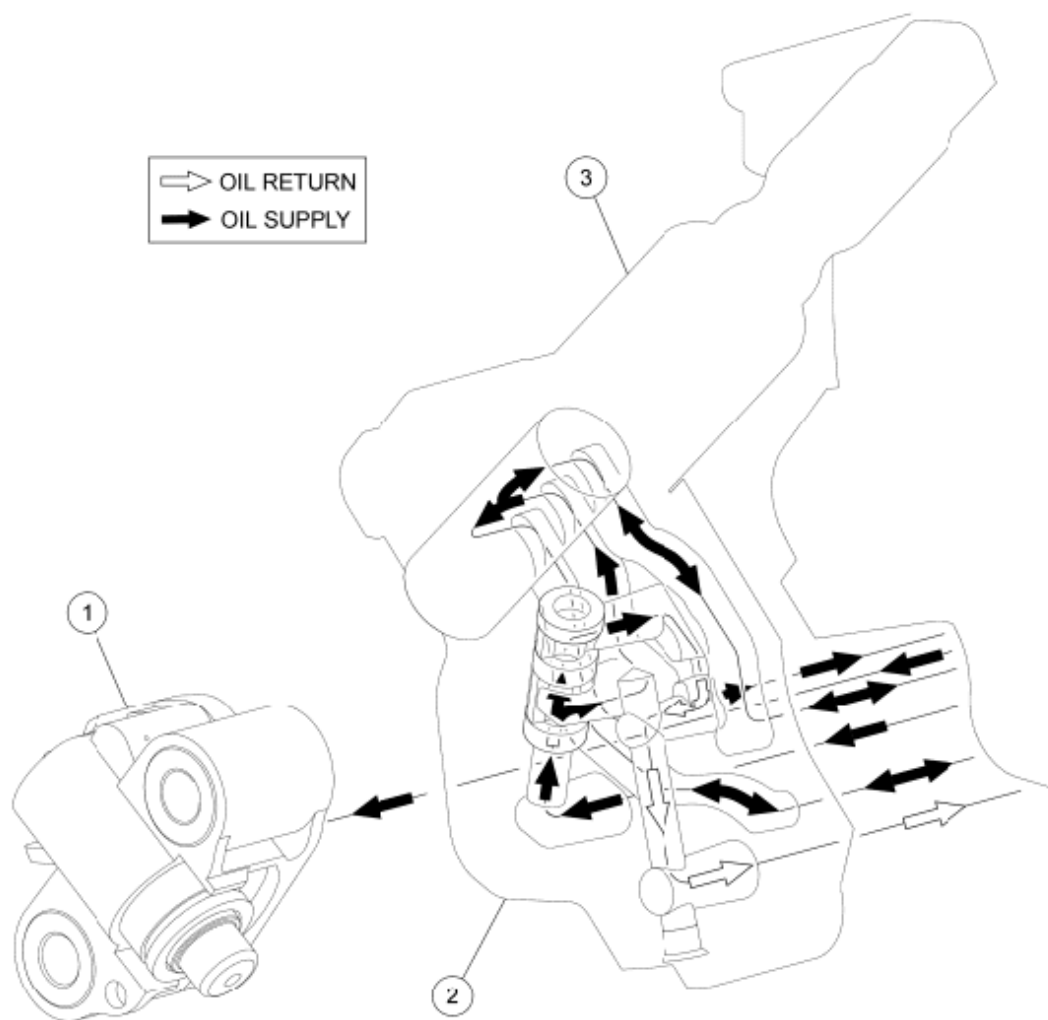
Camshaft Phaser And Sprocket, Camshaft Phaser And Sprocket Bolt And Camshaft - Oil Flow Diagram
